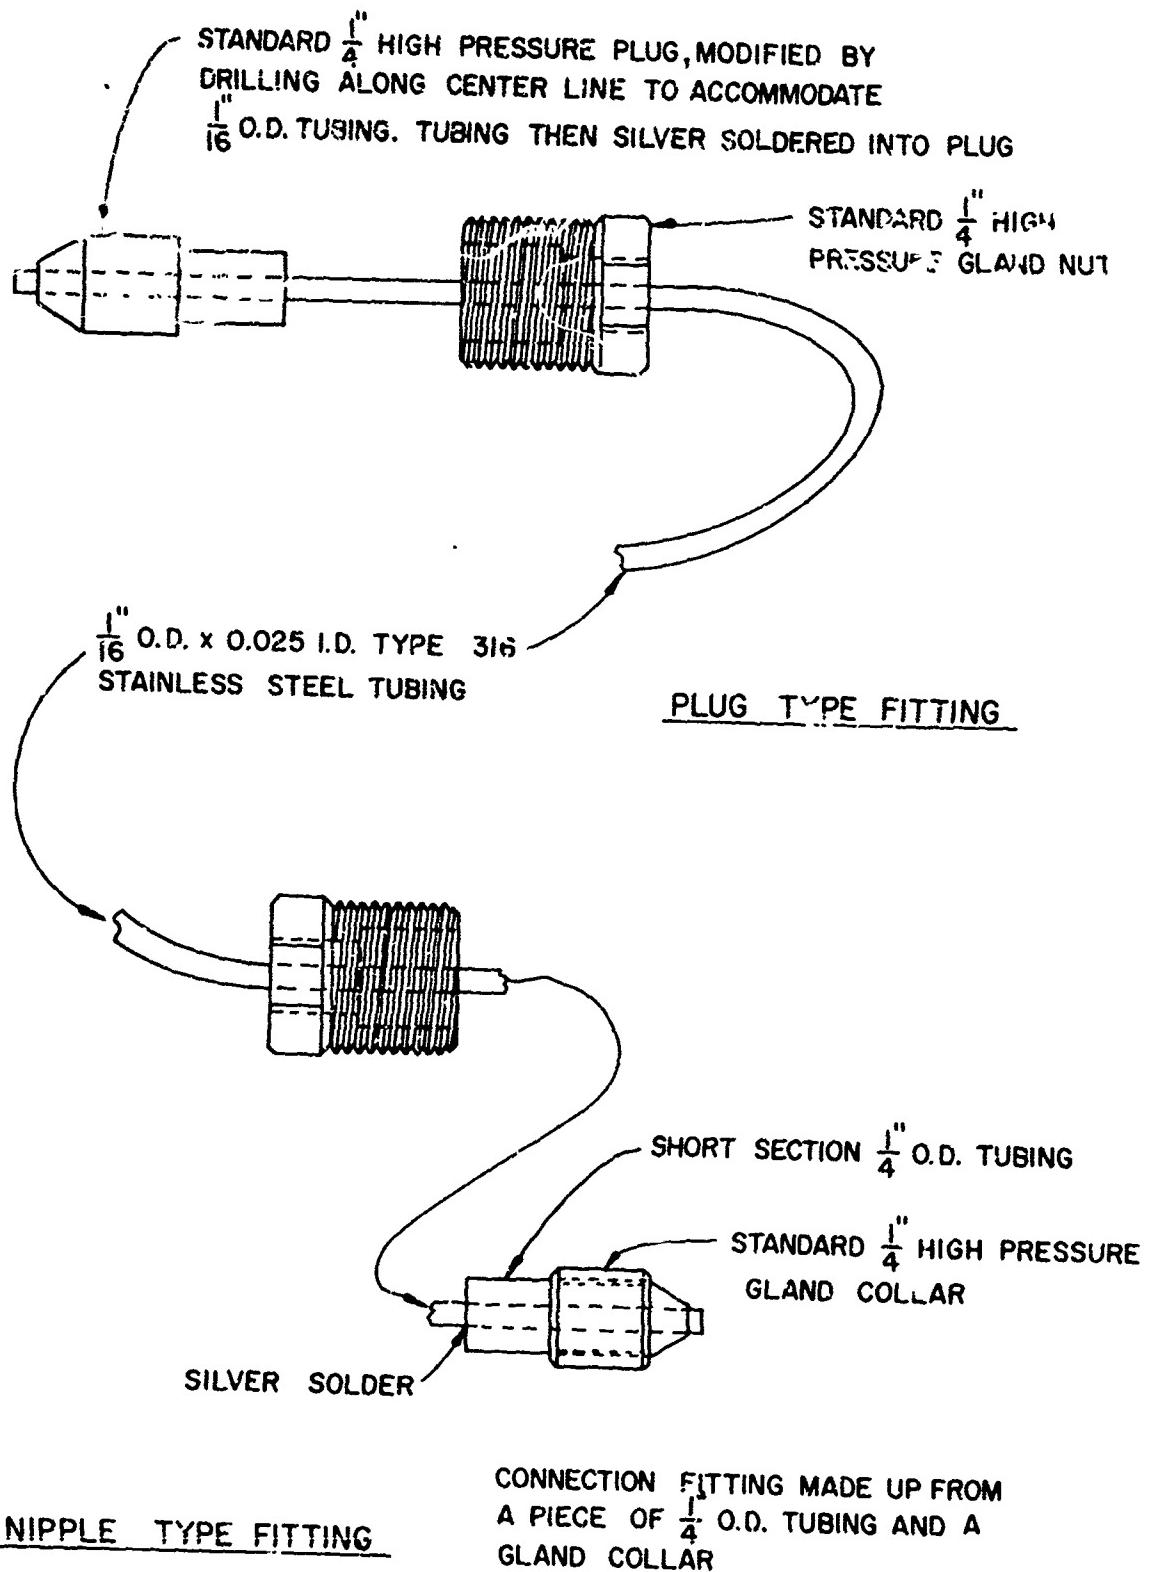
"Flexible" 1/16-inch o.d. high pressure tubing and connection system.
